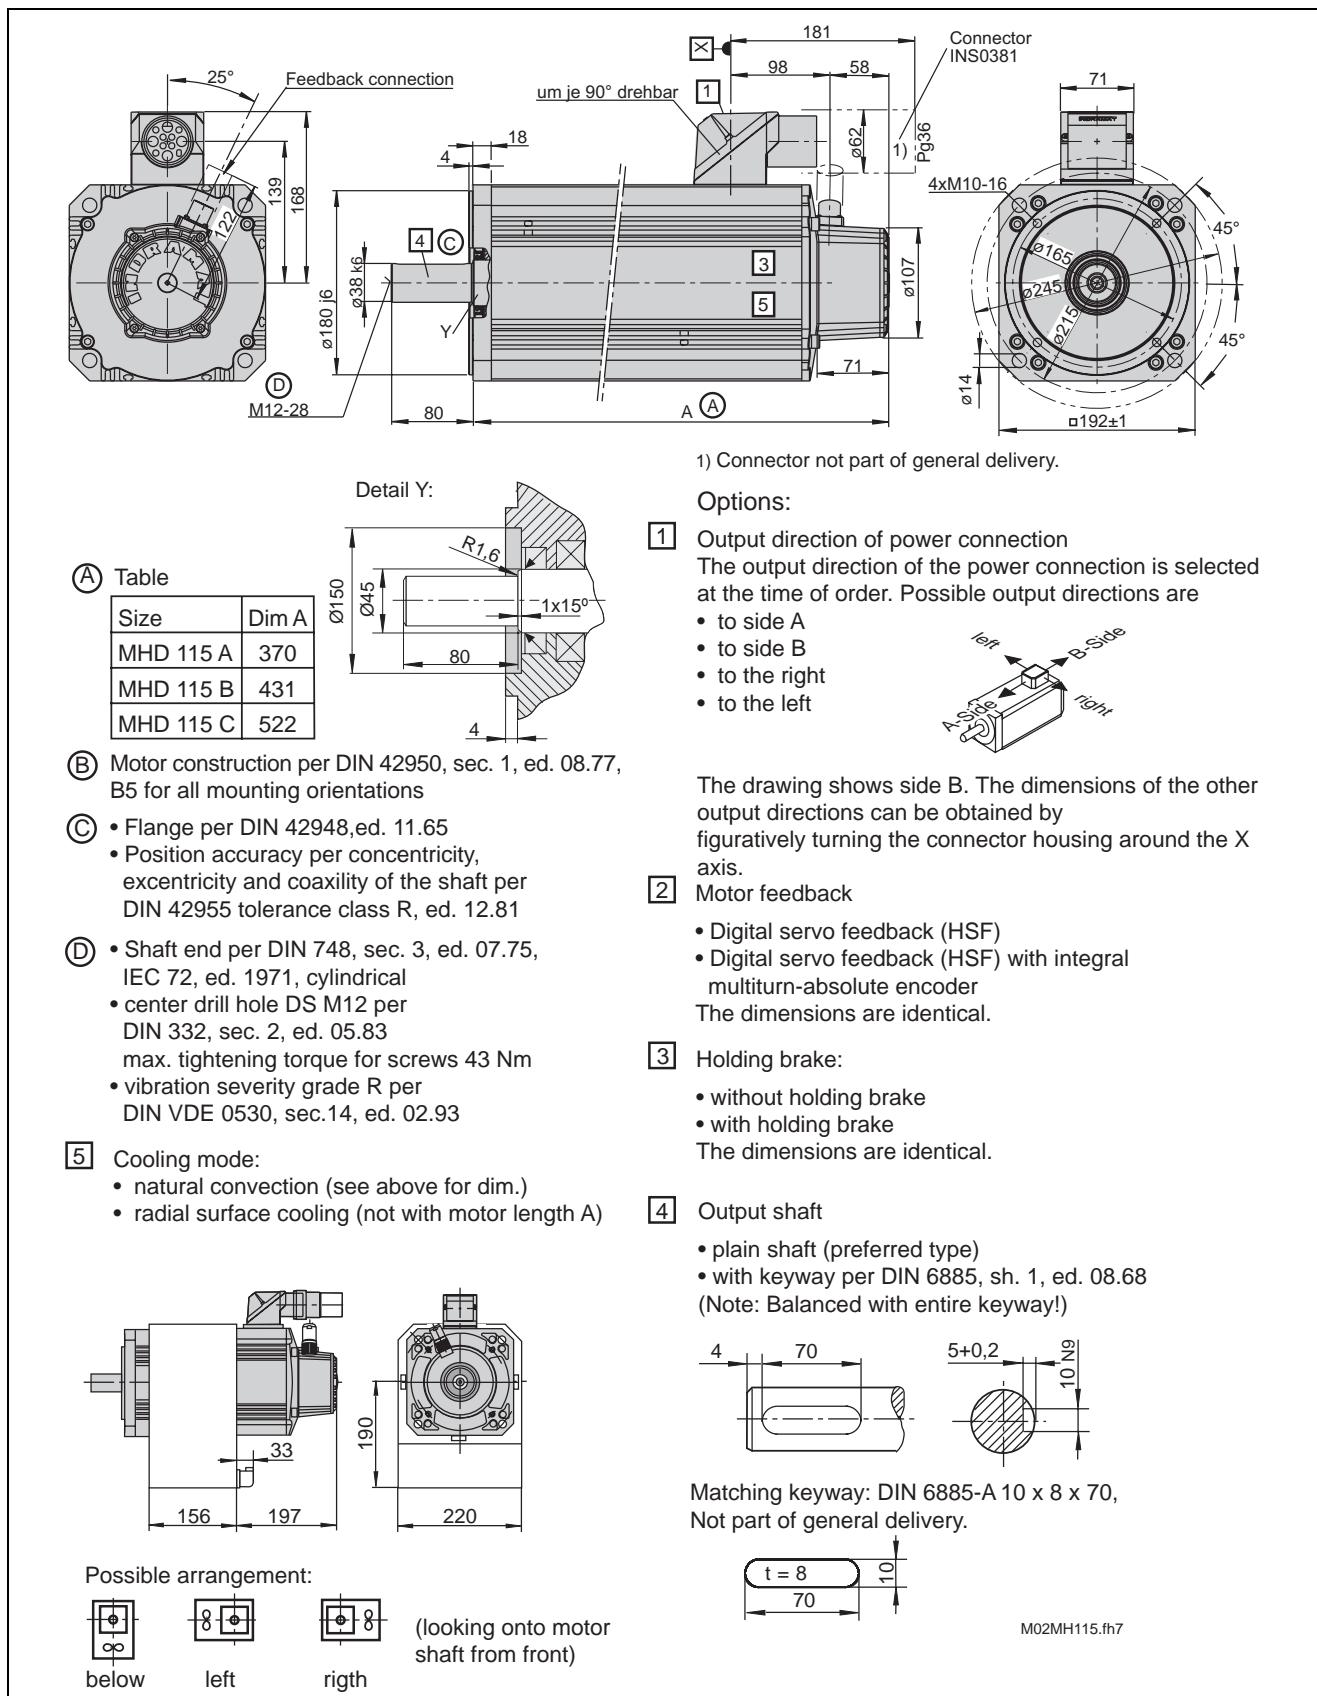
Dimensional sheet - MHD115.-....-A
